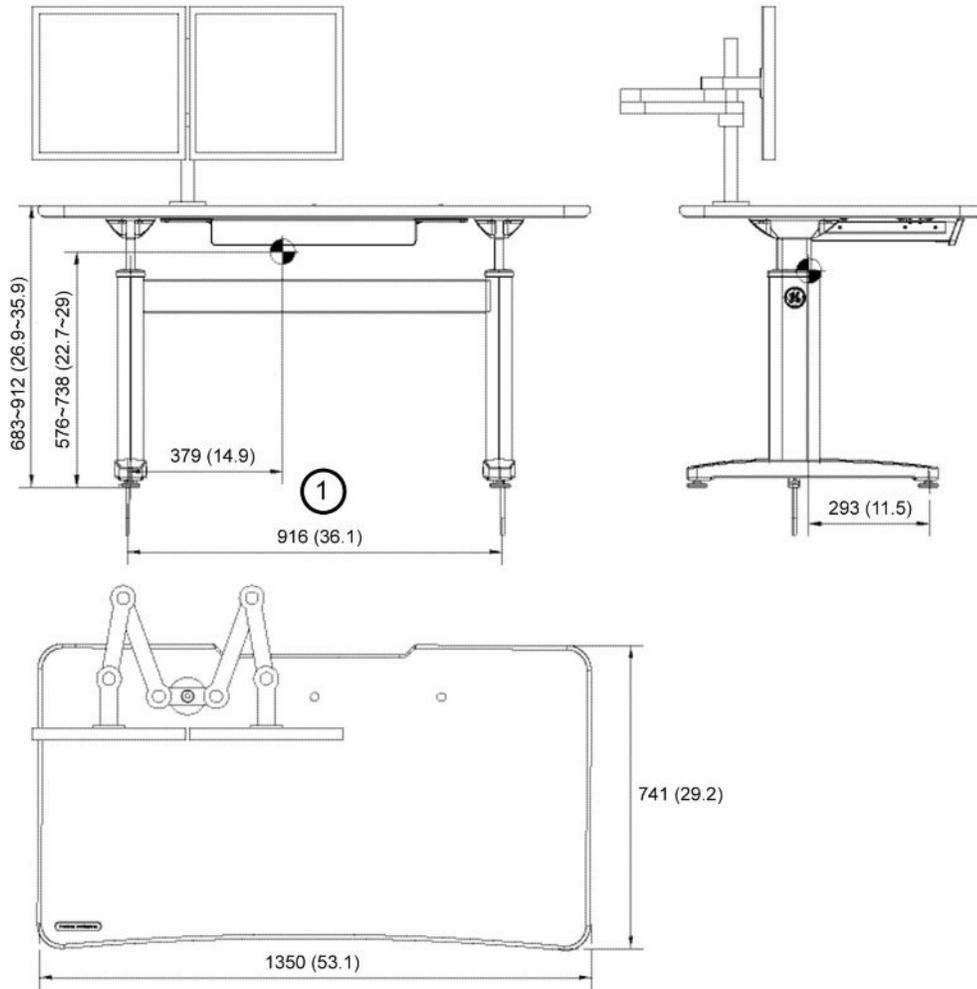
PARC4 (Q.Core Power) Reconstruction Cabinet Dimensions
